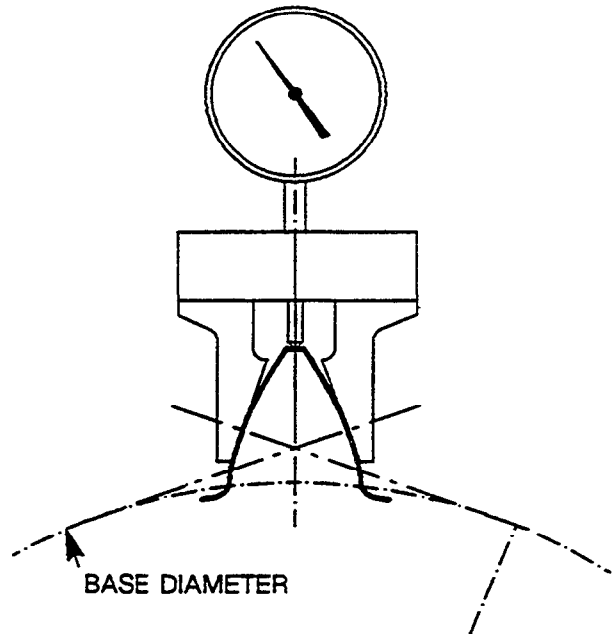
Measurement of Tooth Thickness by Means of a Gear Tooth Comparator
